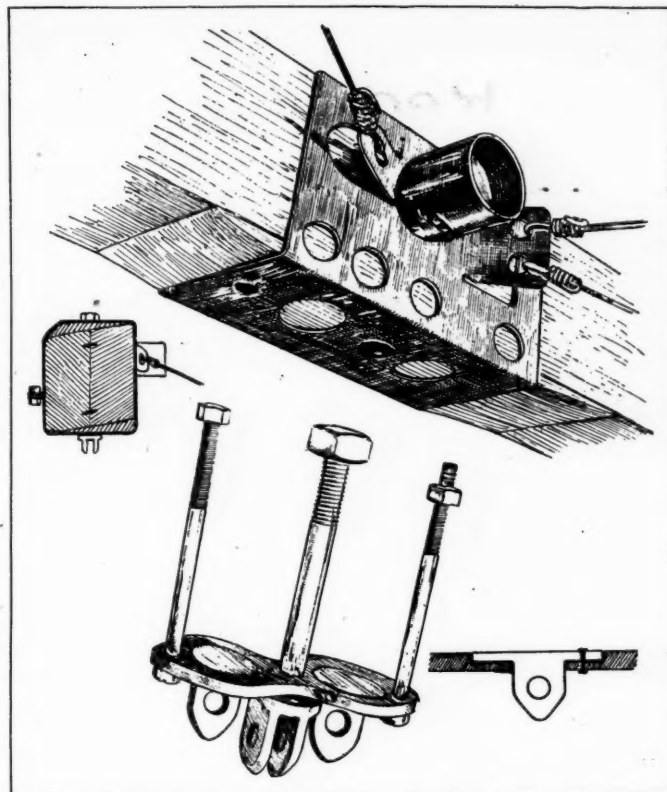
Sheet steel spar box and socket for compression tube of upper plane. The bottom sketch shows the attachment of the terminals for the interplane cables and struts
